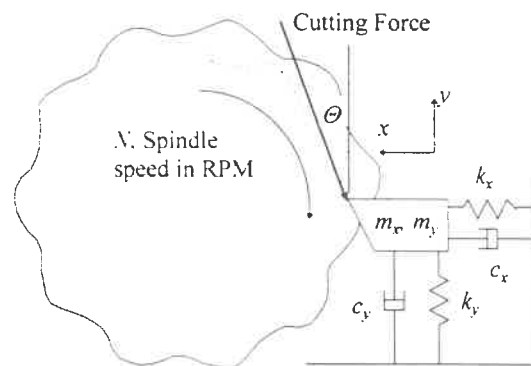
Diagram of a workpiece and cutting tool on two degree-of-freedom spring/damper system.
